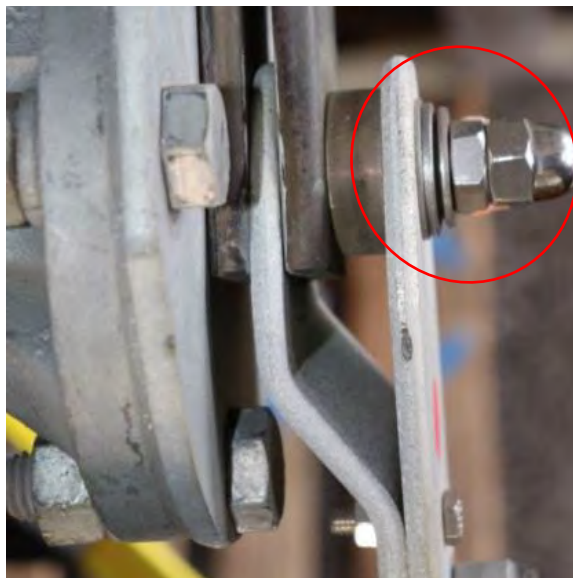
Hardware connecting jumper connector pad to lower Switch 47; SED circled visible hardware in red.⁵⁸
